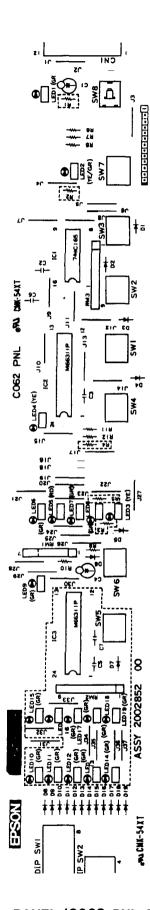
2. BOARD ASSY., PANEL (C062 PNL BOARD) Component Layout
